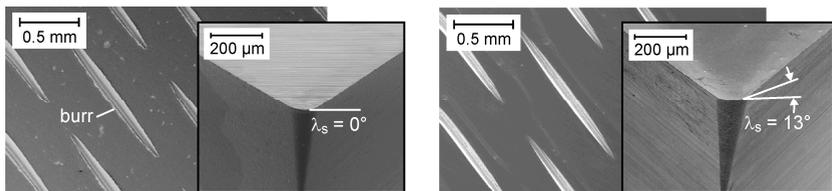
Reduction of burr dimensions by a positive tool cutting edge inclination λ_s
